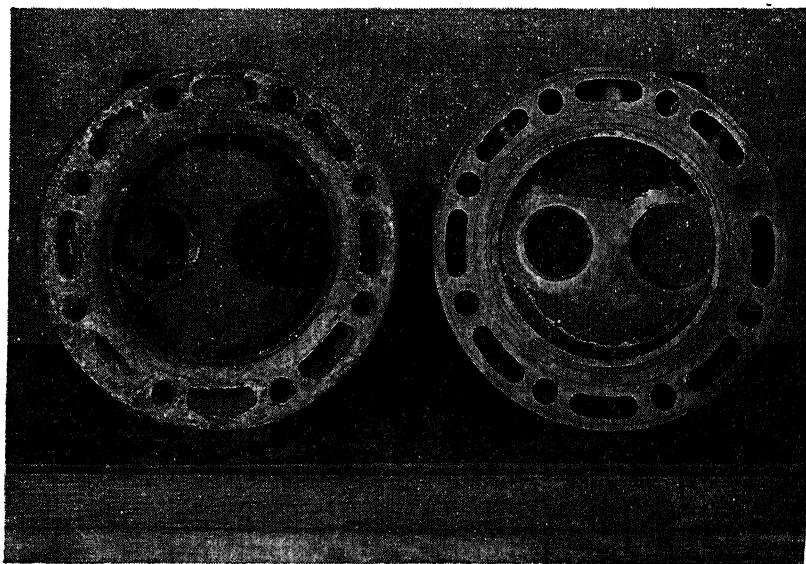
Cylinder head built from ordinary steel instead of expensive corrosion resisting steel. Left hand (port) opening — where corrosion normally occurs — is faced with 18-8 stainless steel electrode. Finished valve is shown on right.
